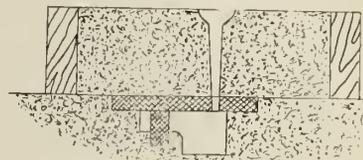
SECTIONAL VIEW OF MOULD READY FOR POURING.
